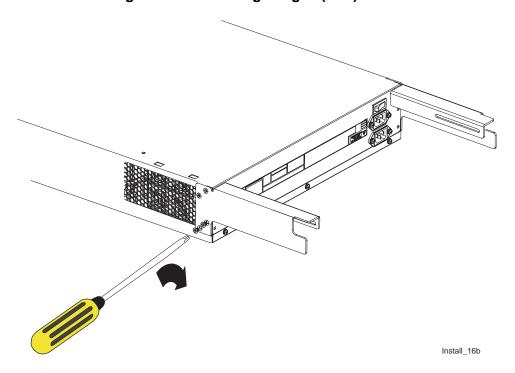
illustrates how to attach the mounting support brackets to the rear posts.
